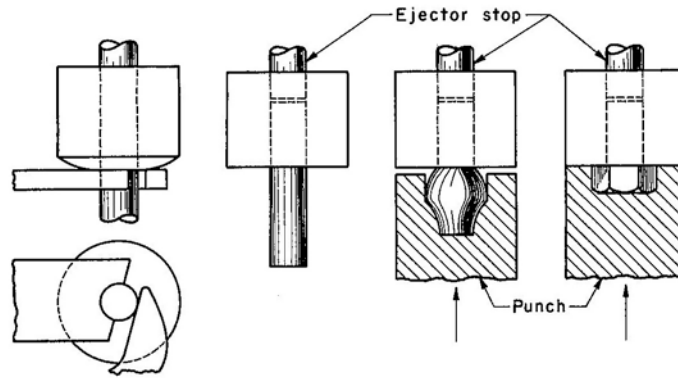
Steps in a cold heading operation, illustrating how the head is formed from the original rod.
